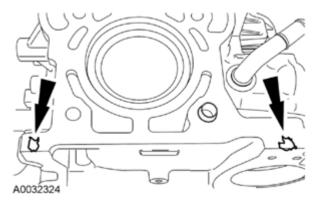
Locating Silicone Gasket And Sealant Applying Area Courtesy of FORD MOTOR CO.
